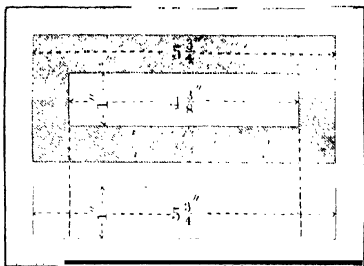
CAST IRON: PLANING, DRILLING, AND FILING.
